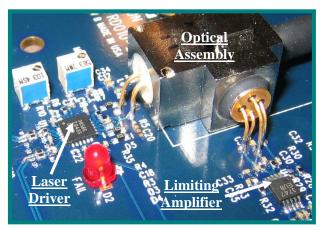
PCB Top Mount Laser Assembly (HFRD 10.2 Shown)
